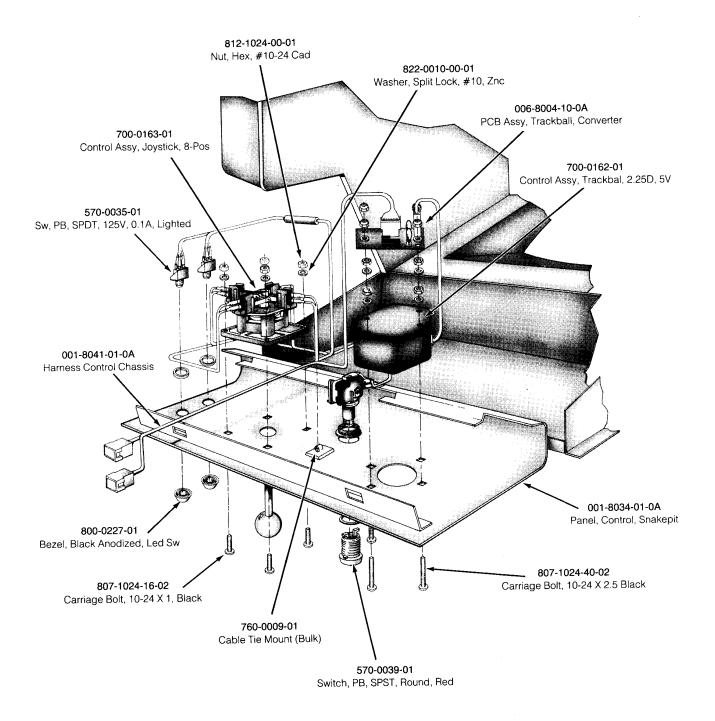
Control Panel Assembly, Snakepit (000-8002-10-0A)
